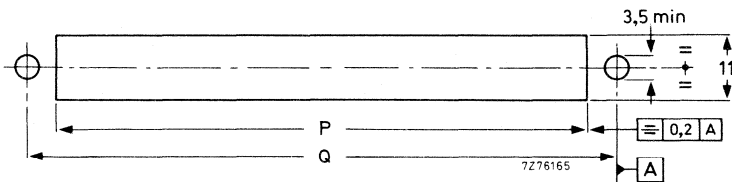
Panel cut-out; see Table 4 for dimensions P and Q.
